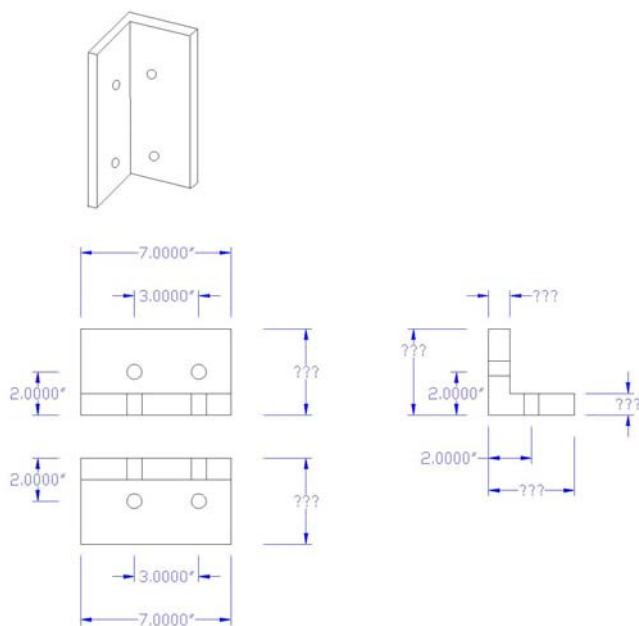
AutoCAD Drawing of Foundation Connectors.
